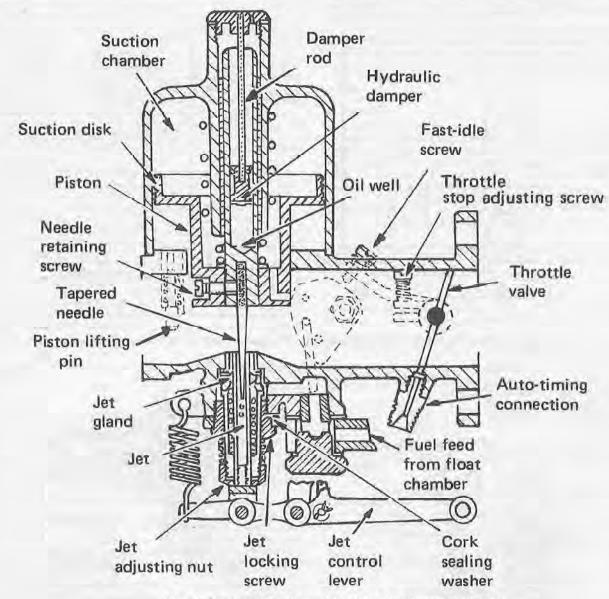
Cross-section through the type H carburettor (Sec 2)
